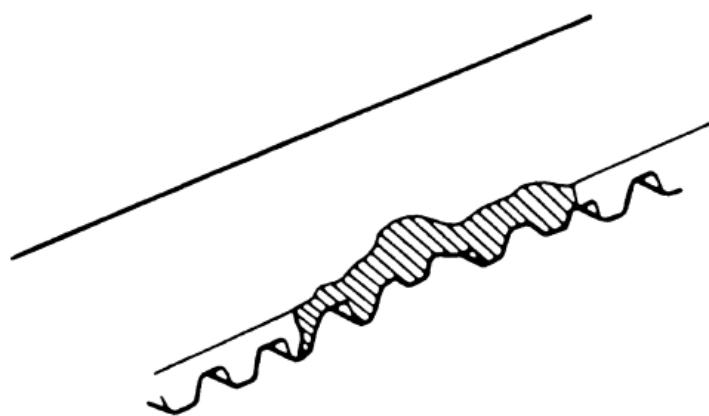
You may only have damage on one side of the belt; if so, the guide could be the culprit
